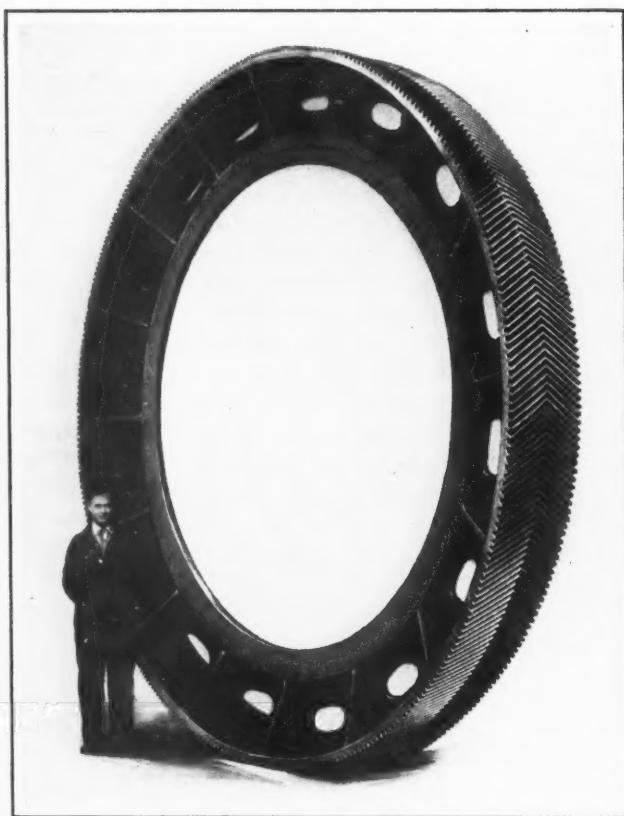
An Unusually Large Gear Used in a Hardinge Conical Ball or Pebble Mill
